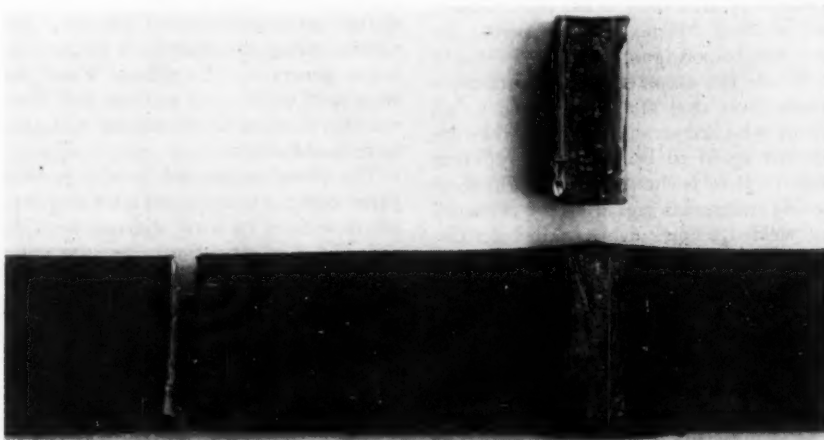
TENSILE SPECIMEN CONTAINING WELDED JOINT WHICH HAS AN ABNORMALLY LARGE AMOUNT OF INTERNAL POROSITY
